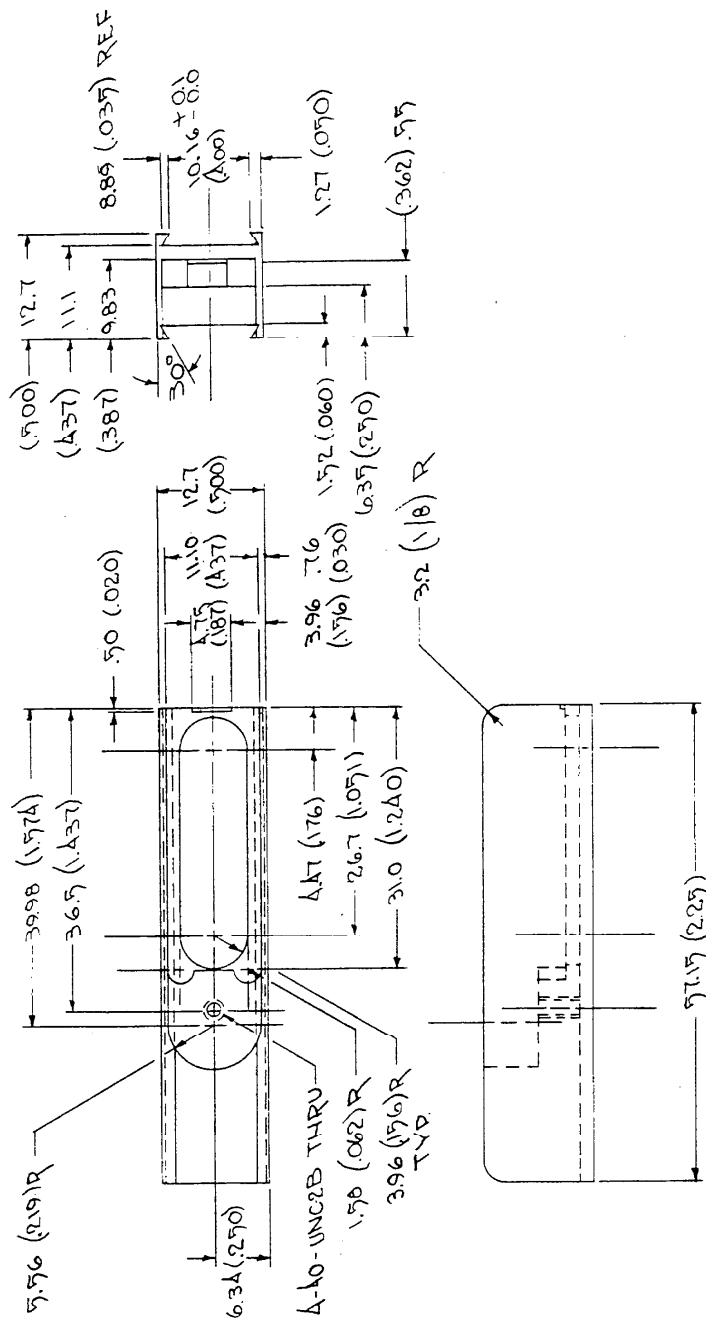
Details of the black anodized aluminum alloy 2024 filter holder body. Dimensions in parentheses are in inches. Dimensions not in parentheses are in mm. Tolerance ±0.1 mm.
